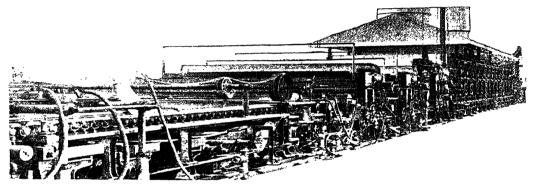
Photograph of a paper-making machine, used for making book paper.
